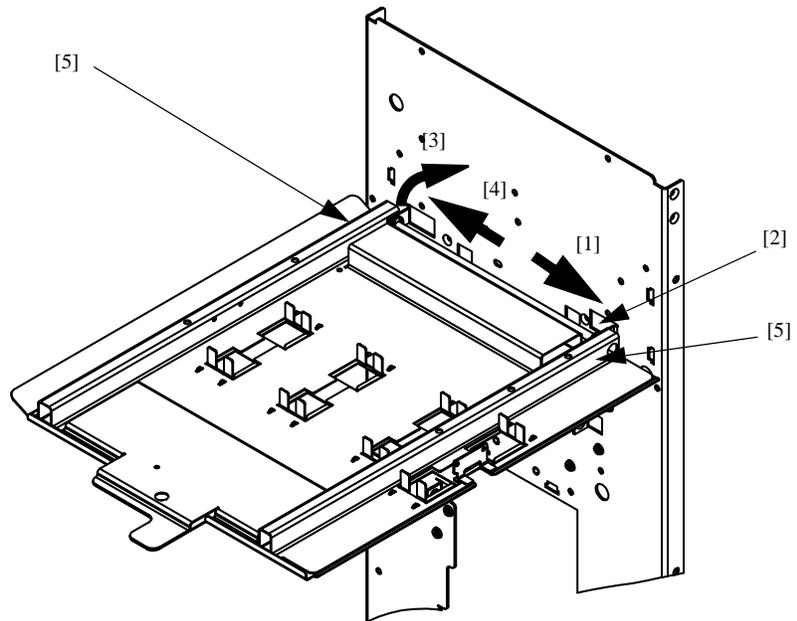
Bypass Panel, Shaft, and Rear Frame.
